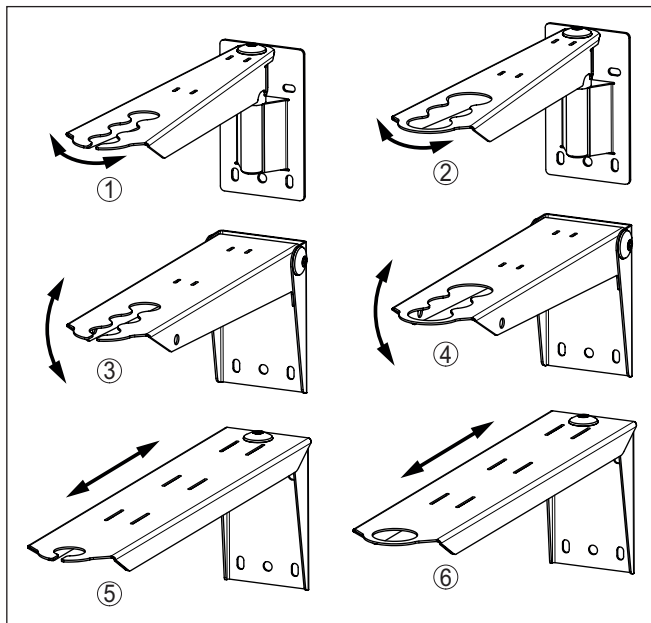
Mounting strap for wall mounting - turnable, extendable, foldable
